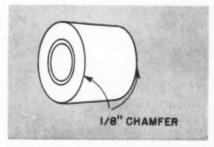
Tapered roller: stock diameter, 61/4 inches; length of finished part, 4.500 inches; bored for 3.000-inch o.d. bearing bushing; tapered 6 to 5 7/16 inches; ends given 1/e-inch chamfer; raw material, SAE 4150 bars.
